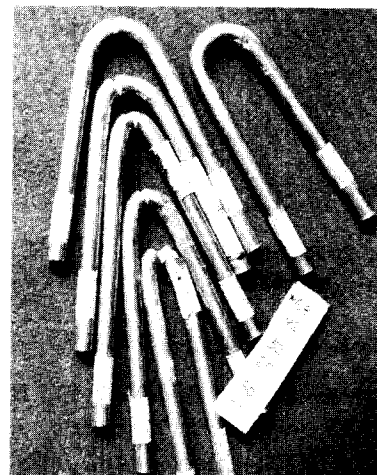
Bending test specimen of cold pressure welding.
